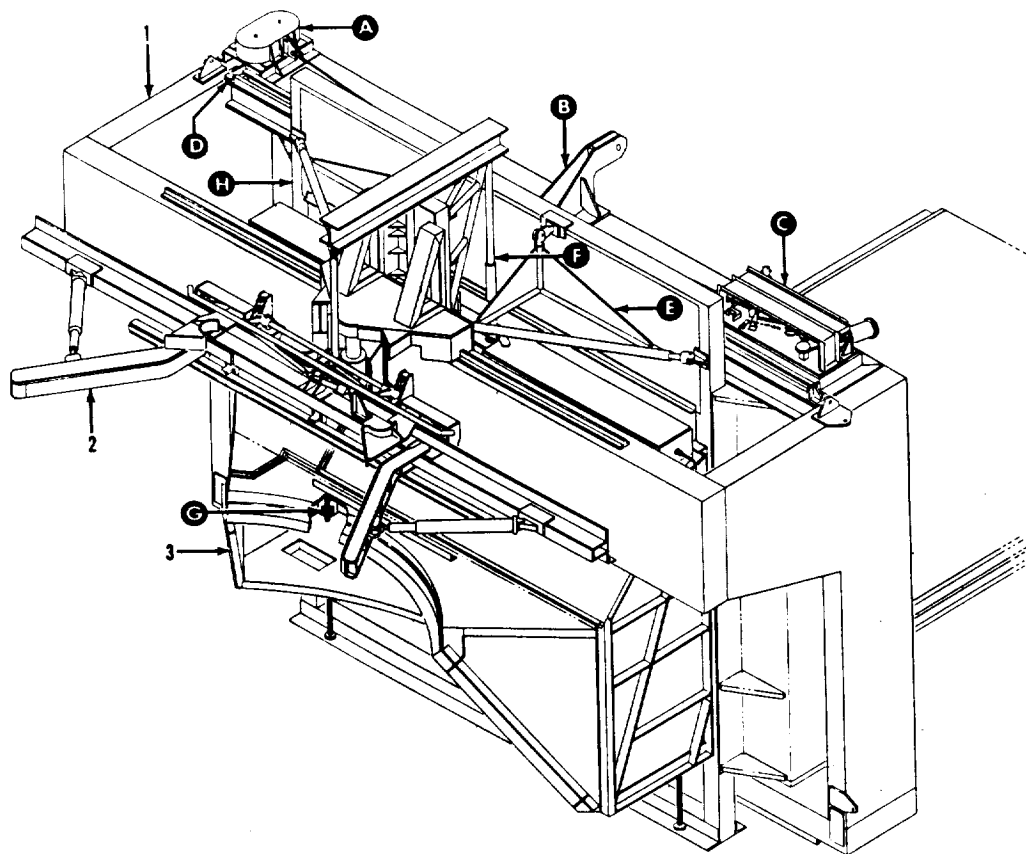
Distributor Box Assembly (Sheet 1 of 2)
